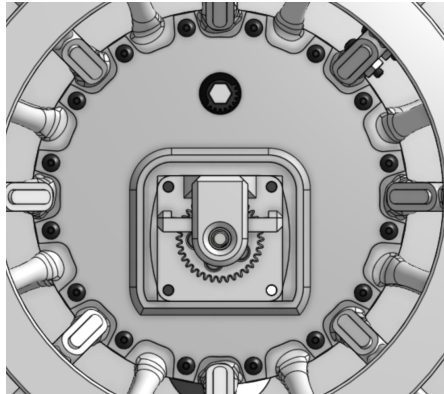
#10-32 $\frac{3}{4}$ " bolts and matching nuts installed through the trunk's aligned mounting holes.
